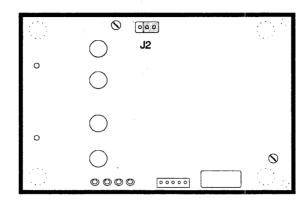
CCD Control Board (5KCCD) Jumpers
